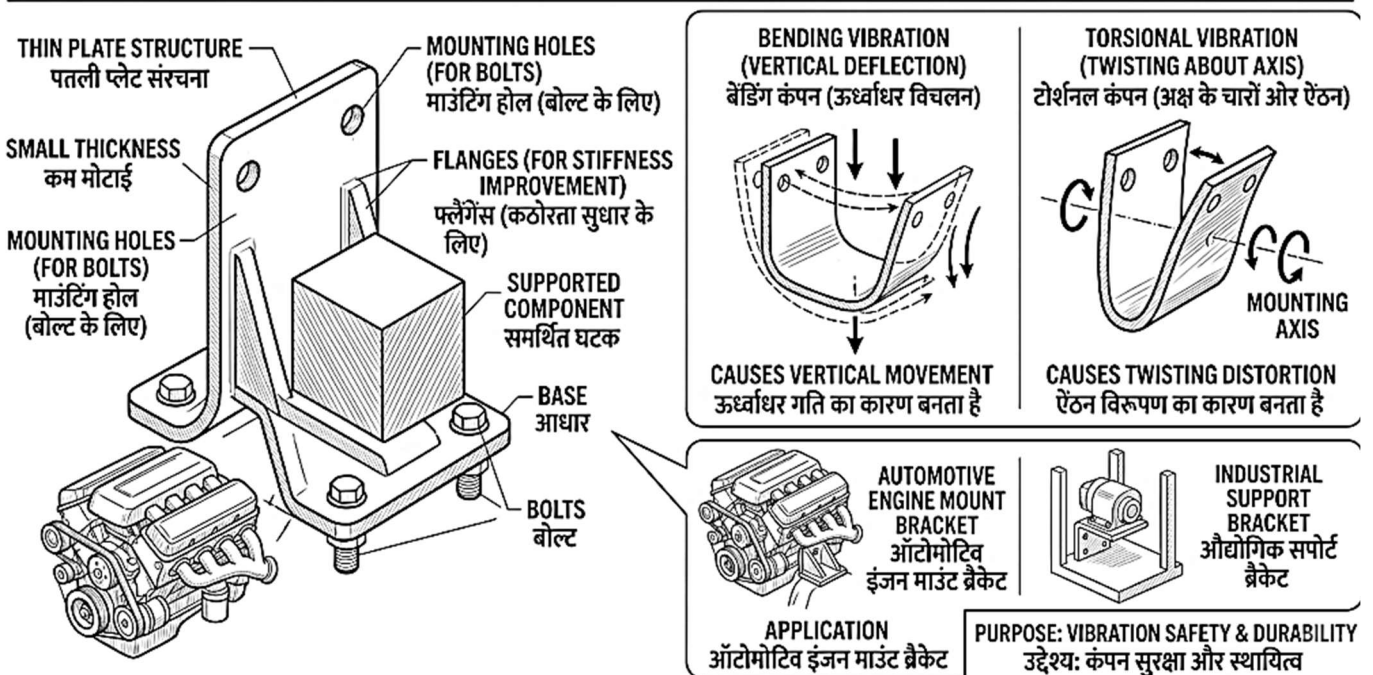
Bracket Construction, Vibration Failures and Applications | ब्रैकेट का निर्माण, कंपन विकृतियाँ और अनुप्रयोग
